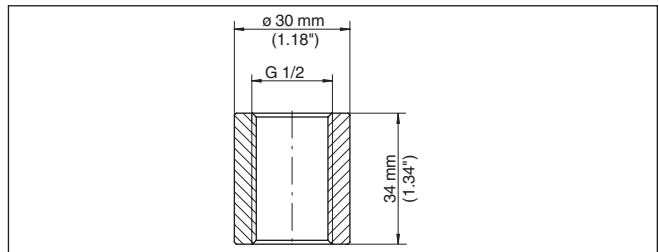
Dimensions of welded socket, thread G $\frac{1}{2}$  (EN 837) - manometer connection - VEGABAR 81, 82, 83
